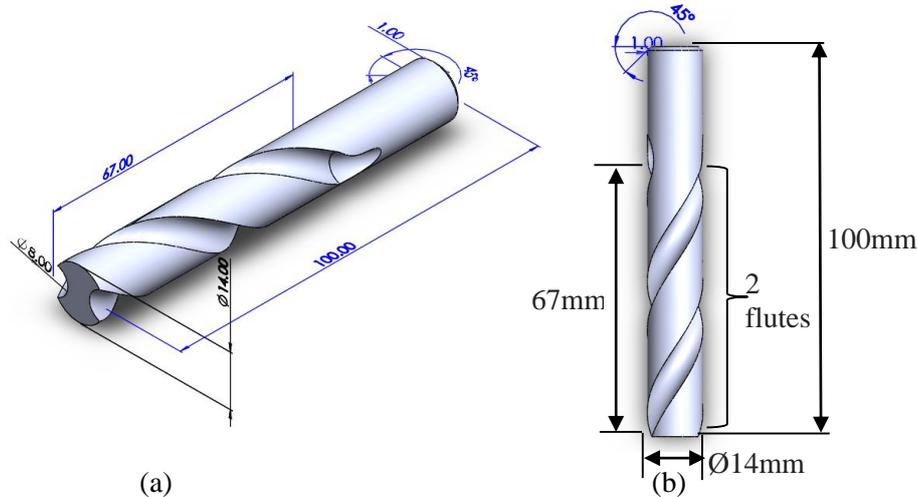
Two flutes cutter (a) in 3 dimensional (b) in 2 dimensional
